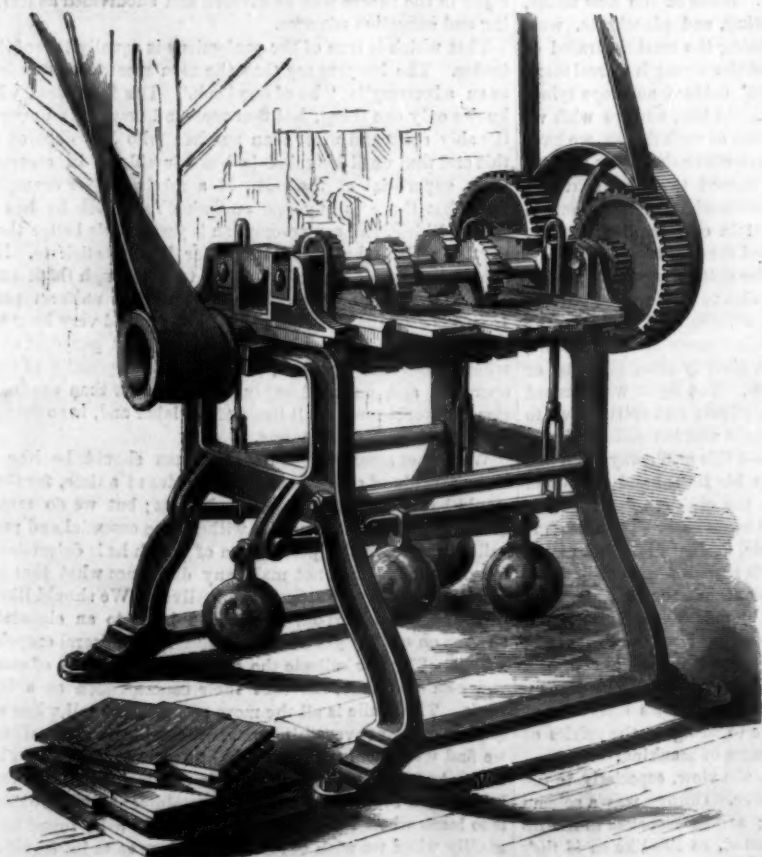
MACHINE FOR DRESSING BARREL HEADS.
